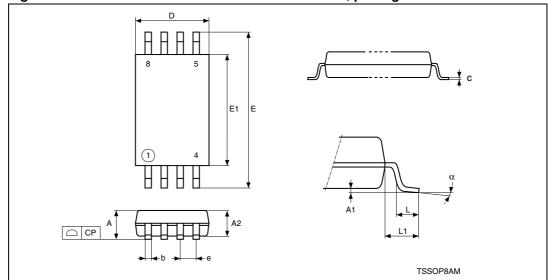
TSSOP8 – 8 lead thin shrink small outline, package outline
